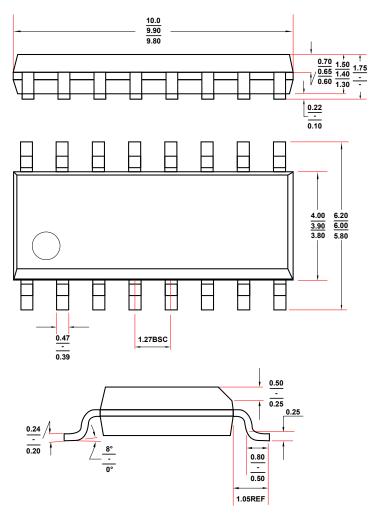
16-Lead SOIC Package Dimensions Shown in Millimeters
